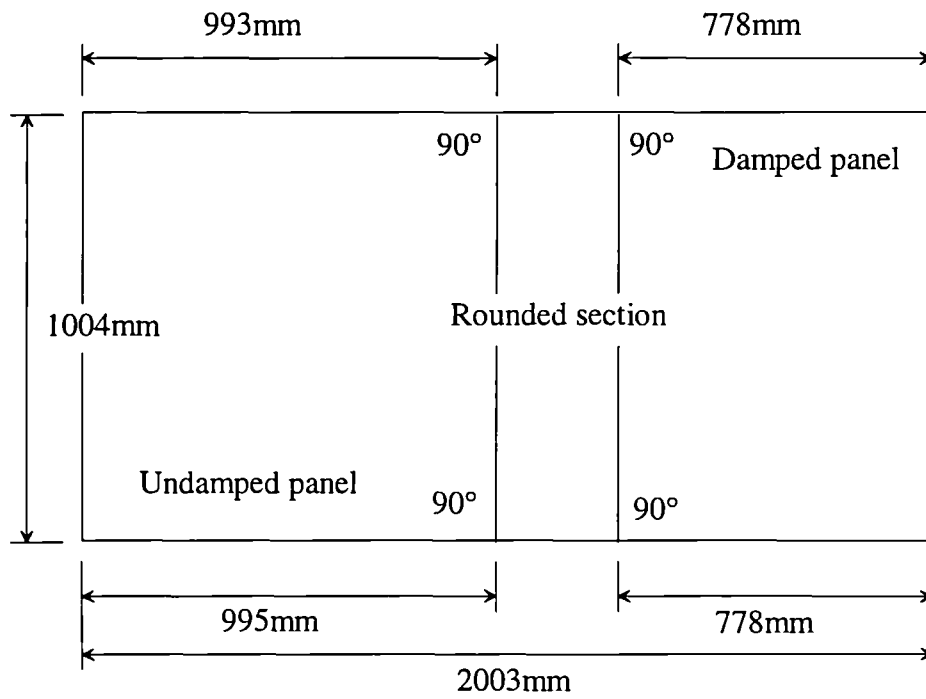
2mm panel, 131mm radius joint with 103° bend.
